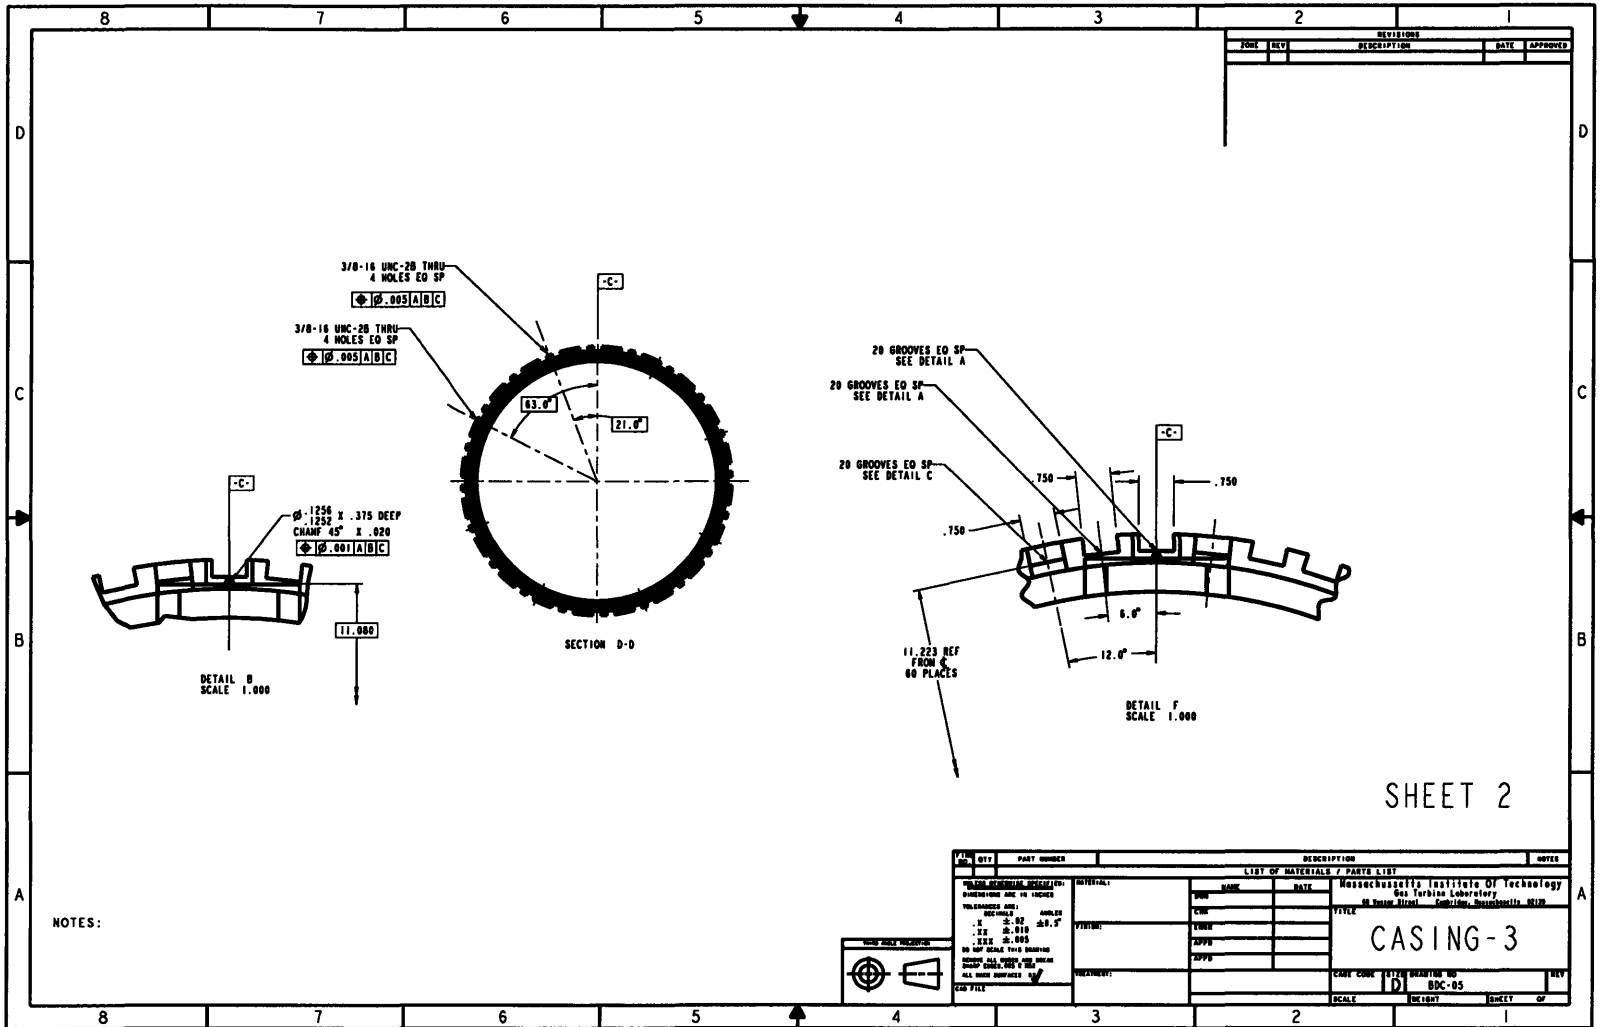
Engineering drawing of sheet 2 of Casing 3
